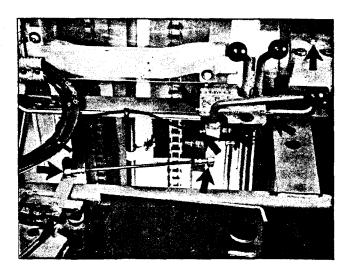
Drive Control Handle Lubrication. Two grease fittings; all moving parts to be lubricated, sparingly, with S.A.E. number 20 engine oil.
